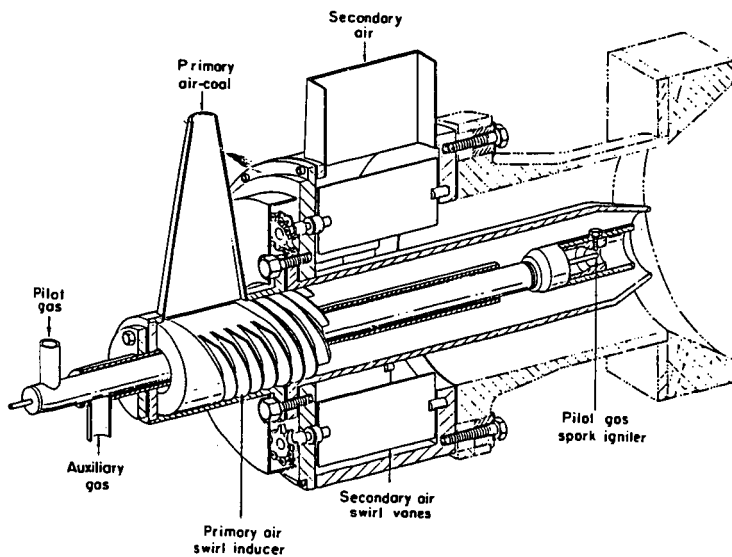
MULTI-FUEL BURNER ASSEMBLY.
